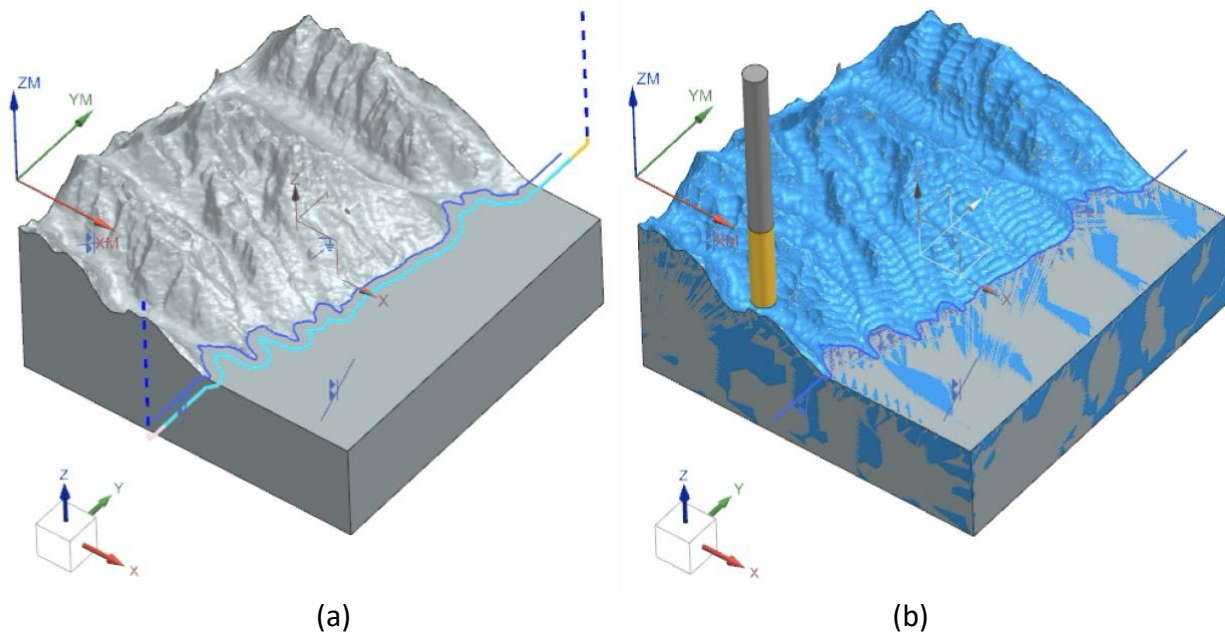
Finishing 3 – Planar Mill  $\frac{1}{4}$ " endmill (a) tool path and (b) IPW.
